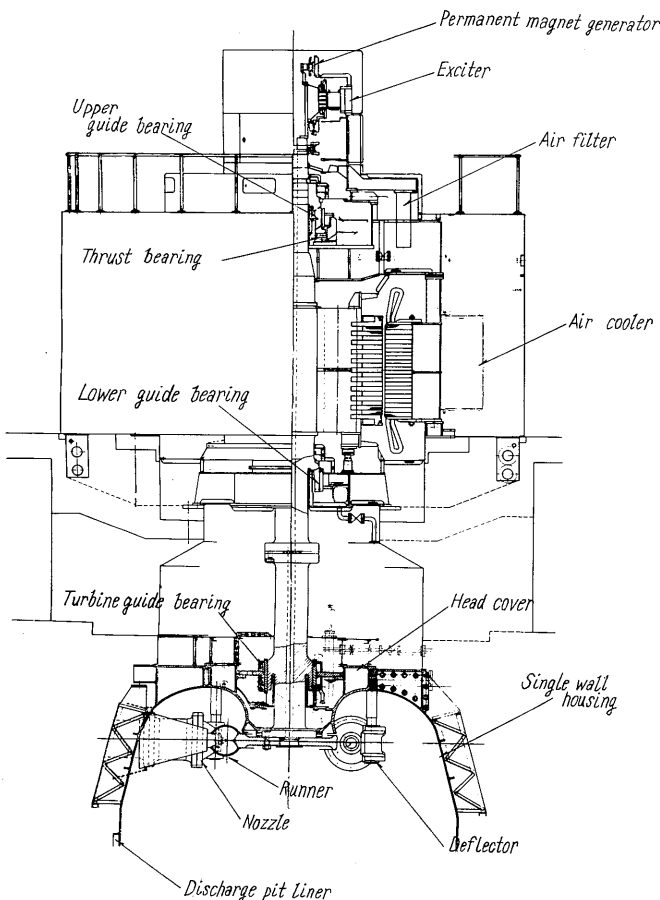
Cross-sectional view of Pelton turbine and generator (Kuttiadi Power Station)
